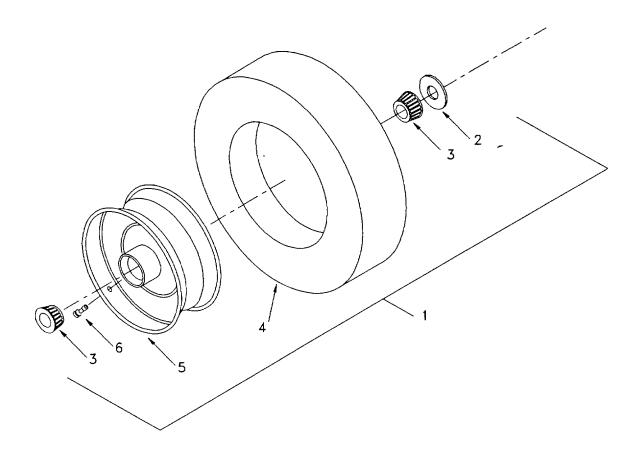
WHEEL AND TIRE ASSEMBLY (CA053)
